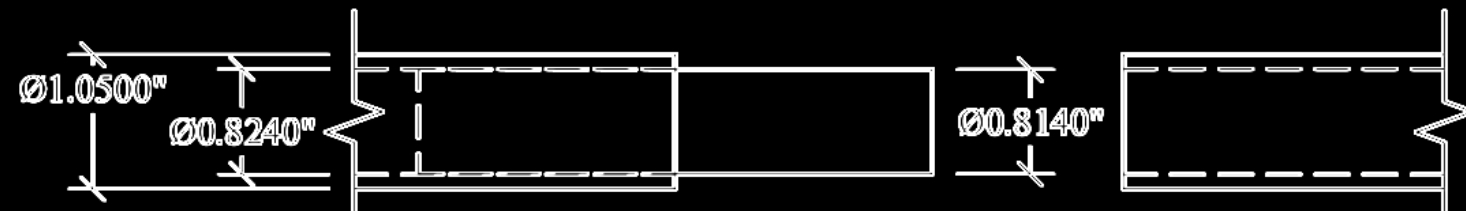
Side View of Sleeve Fitting for One Superstructure Member [2]
